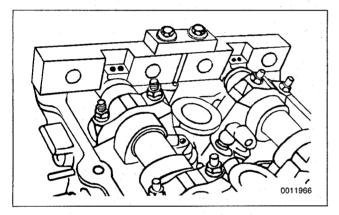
BMW special tool no. 11 3 240 installed on rear of camshafts to hold them at TDC. (M44 engine shown. Other engines are similar.)
